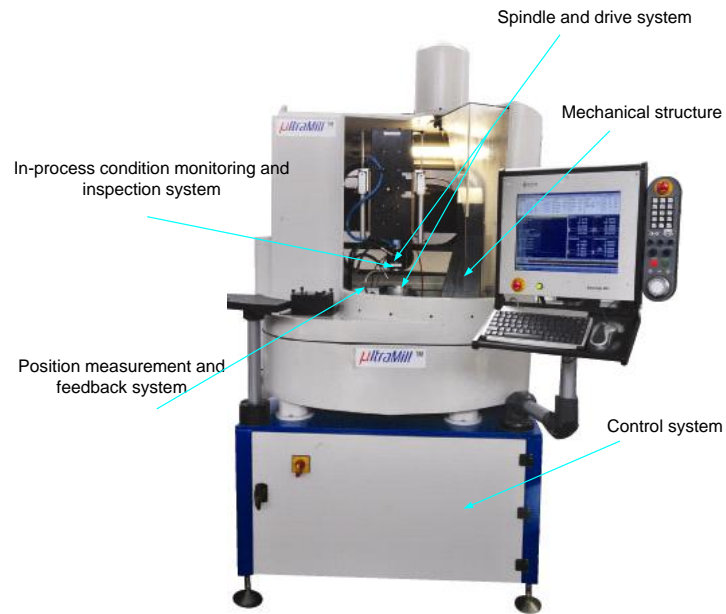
Schematic figure of a 5-axis micro milling machine (Huo and Cheng, 2008)
